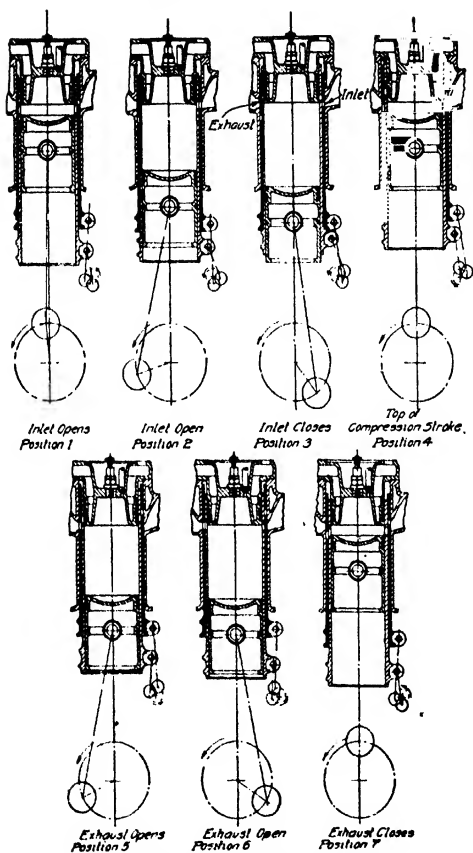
Valve and Piston Positions for Stearns-Knight Motor
